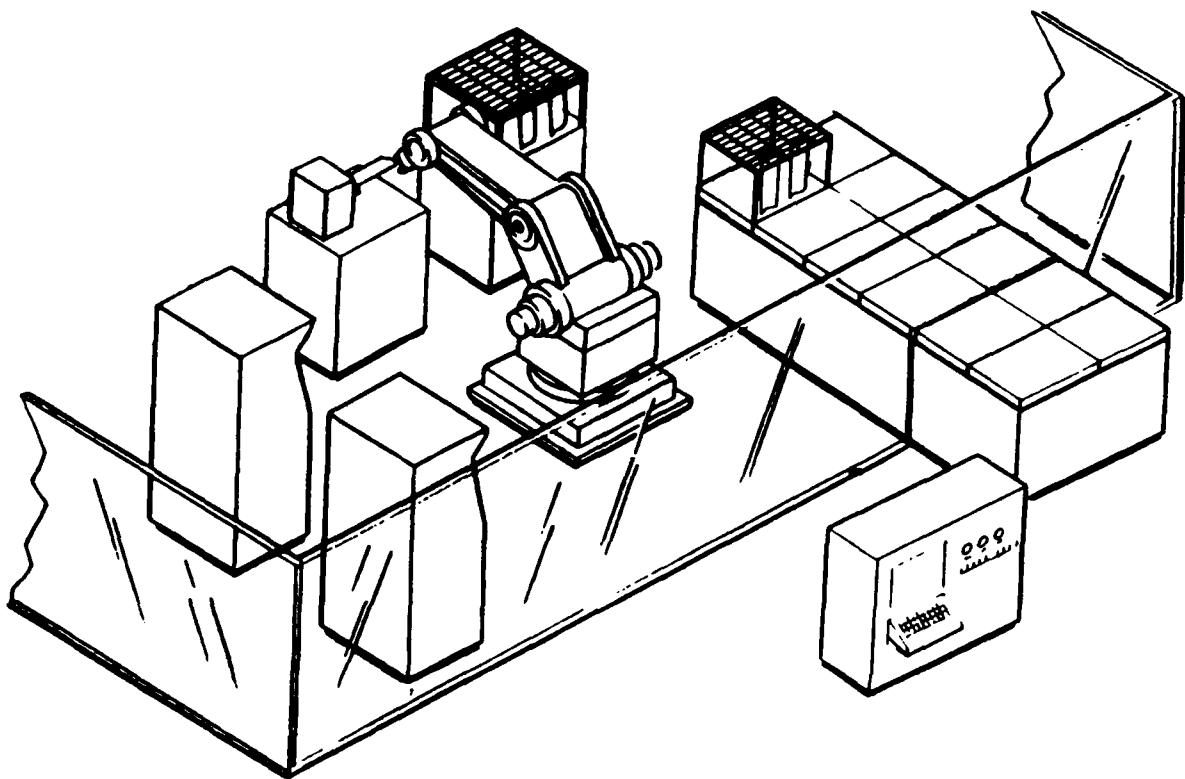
F-100 INLET FAN MODULE BLADE ASSEMBLY SYSTEM. The robotic system can balance, classify, and mark each of the blades before it puts them into a holding fixture. When all the blades in a set are finished, the robot controller sorts the blades so that opposing blades are balanced and then commands the robot to put each blade back in its sorted position in the initial storage rack.
